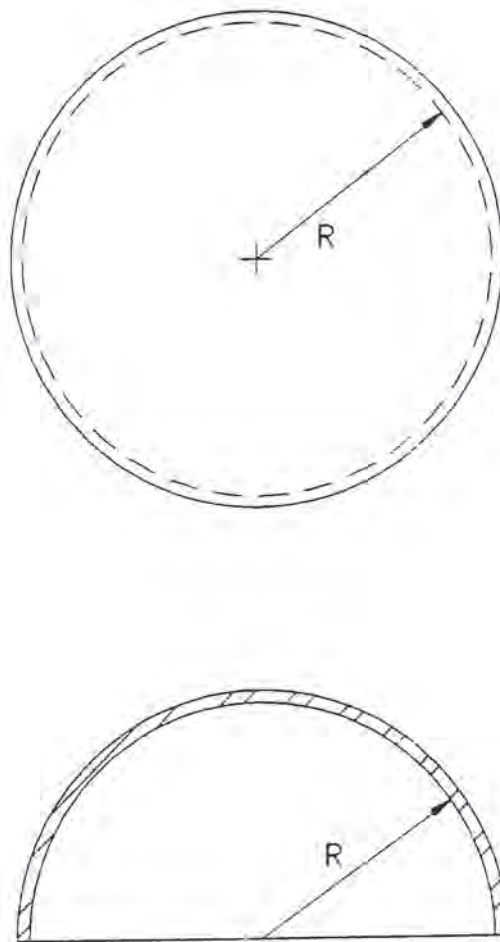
Typical hemispherical head used on cargo tanks designed for higher pressure.
